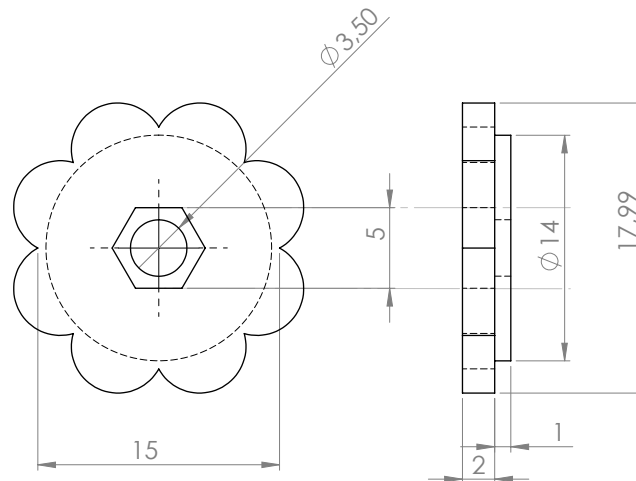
Dimensions of the turning knob of the parameter estimation set-up from Figure 18. Dimensions in mm.
